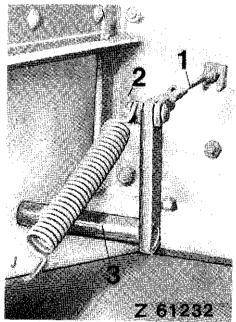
Removal of Parking Brake (Combines 925 and 935)
